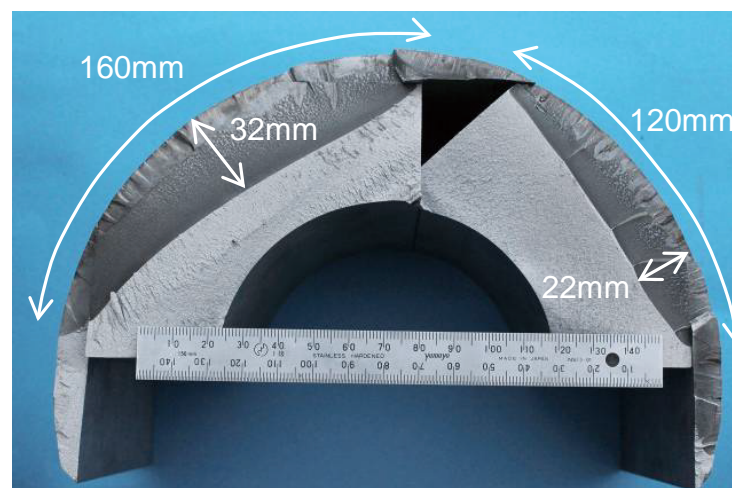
Fatigue testing results of full-scale axles - Fracture surface of the normal axle -
